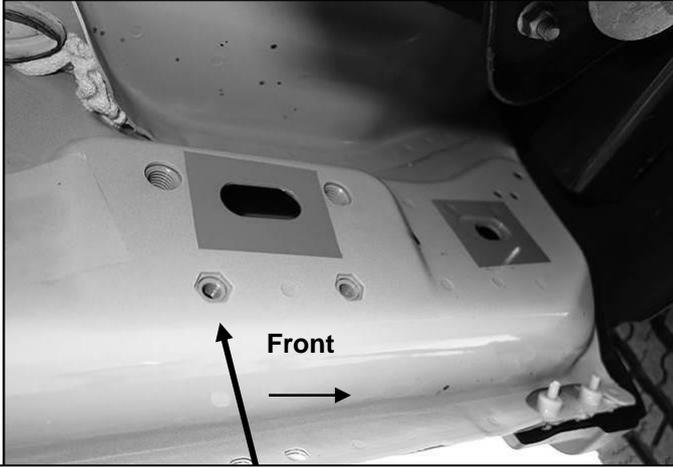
Remove 8mm Hex Bolt. Rotate Bolt Plate to line up with remaining factory hex shaped hole
